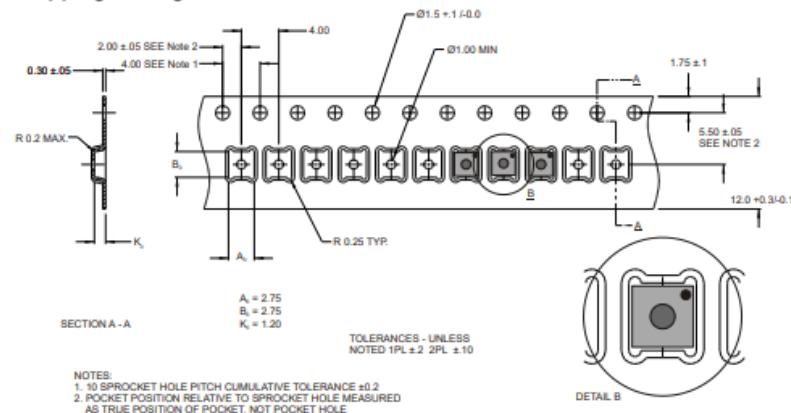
Technical drawing of the packaging tape with sensor orientation in tape. Header tape is to the right and trailer tape to the left on this drawing. Dimensions are given in millimeters.
